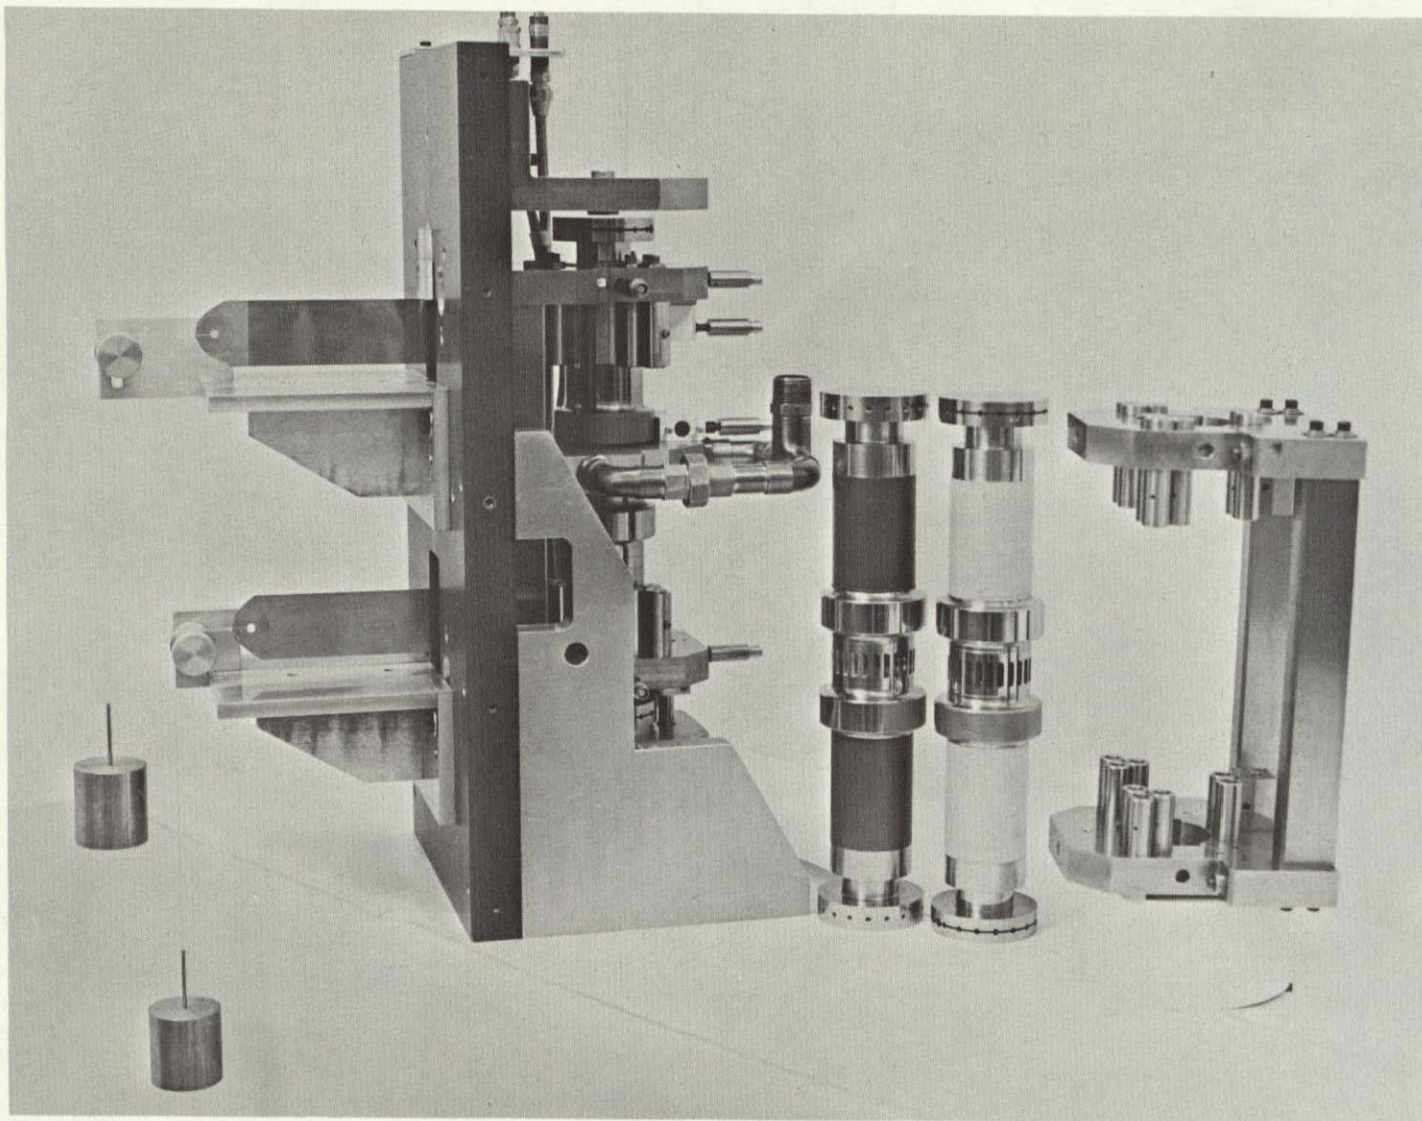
View of Foil-Loading Attachments, Rotors and Foil Support Assembly
